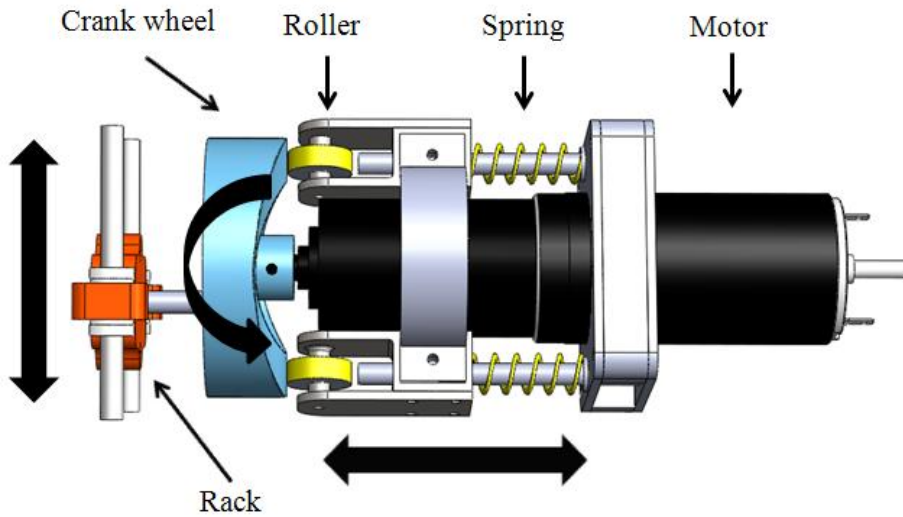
The components of the adjustable Scotch yoke mechanism.
